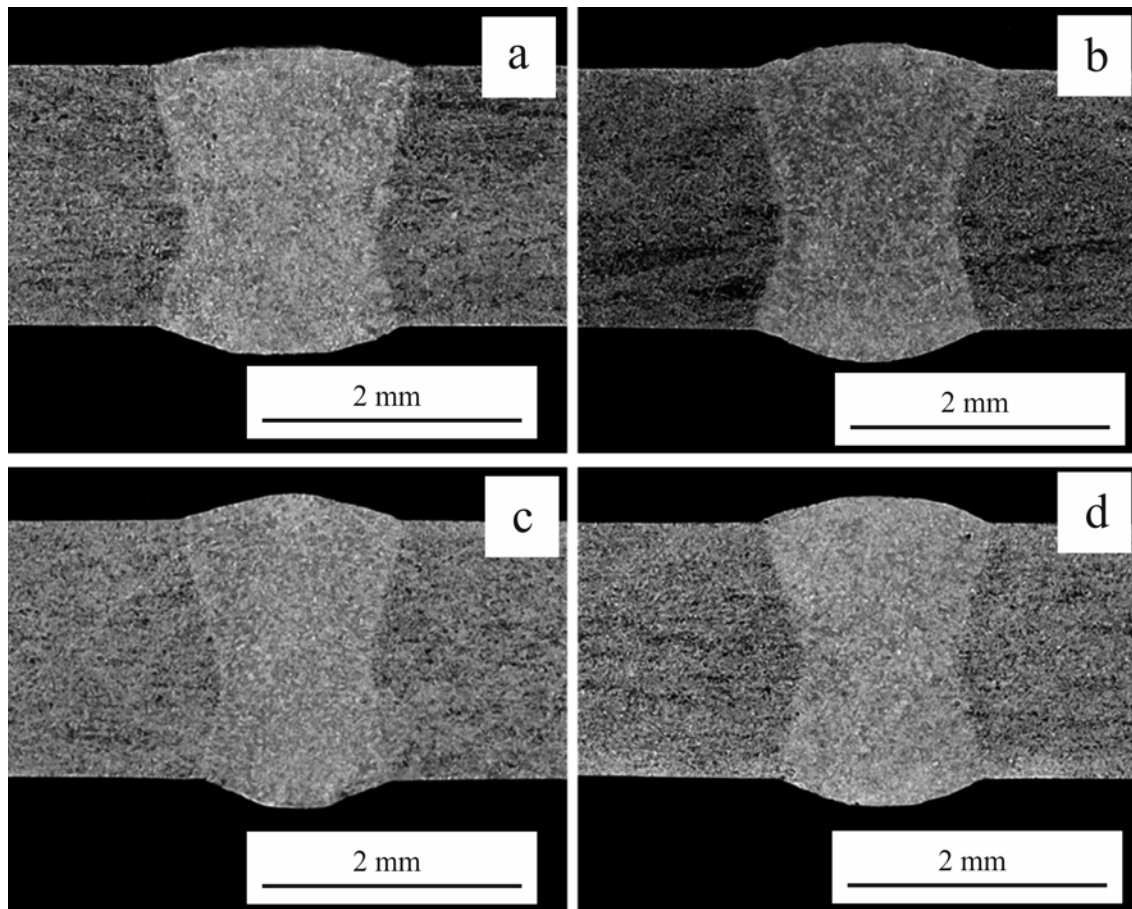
Cross-sections of weld joints produced under different shielding gases: (a) Aluline He, (b) Aluline He30, (c) He 4.6, and (d) Ar 4.6.
